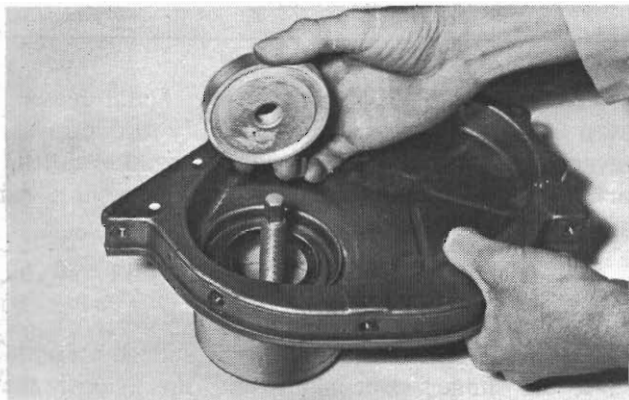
Puller blocks No. E9C57C expanded to puller position (Tool E9C57)
